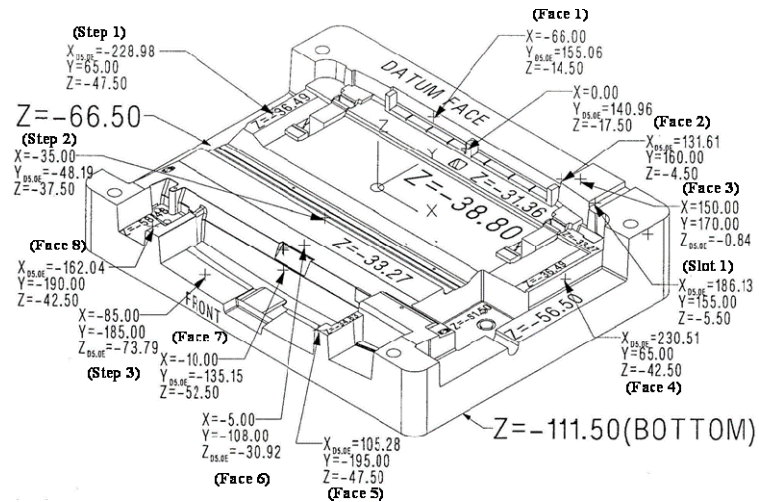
Main Cavity of Injection Mould Assembly 4319 (4 pieces)
